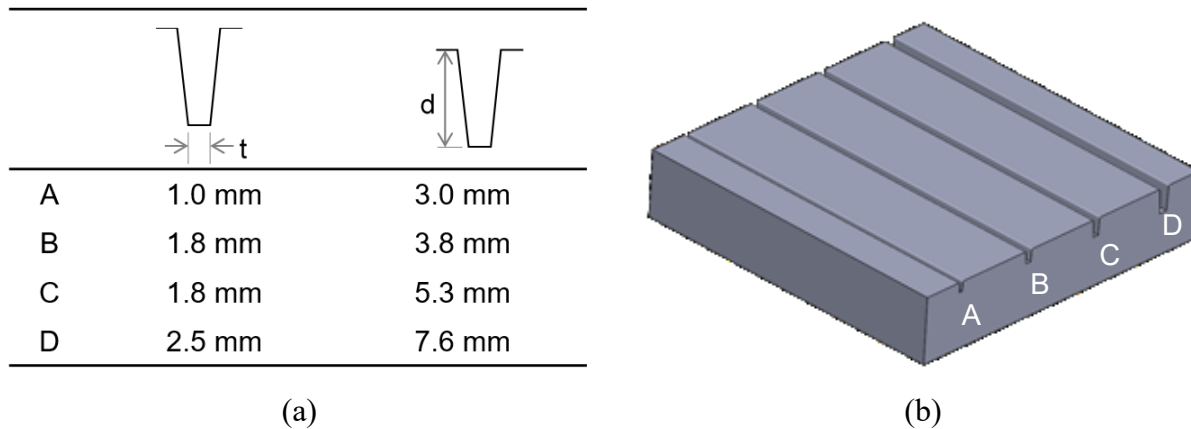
Rib sizes tested for filling showing (a) dimensions and (b) placement within mould.
